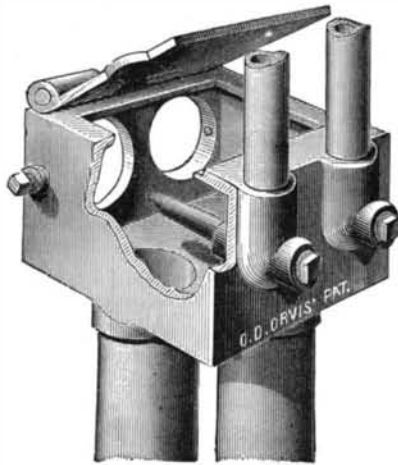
VACUUM CHAMBER WITH TWO STEAM JETS FOR INJECTING HEATED AIR AND STEAM INTO THE FURNACE.
